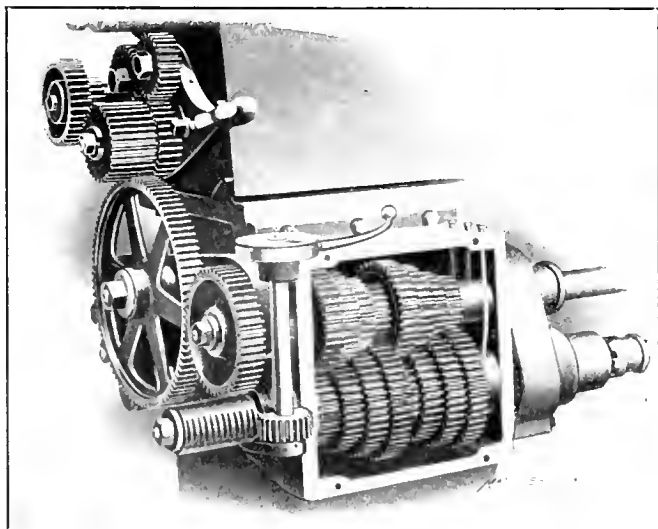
Quick Change Gear Casing, with Mechanism Exposed, showing Pinion and Rack for Shifting the Key.
